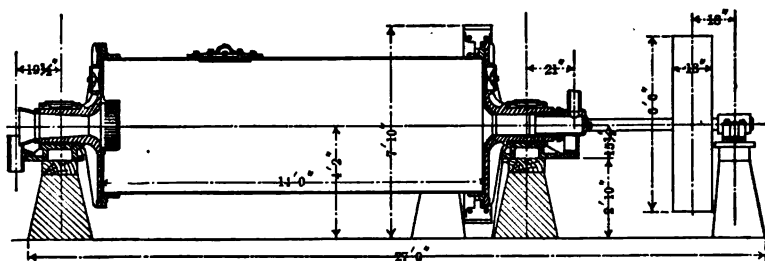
TUBE MILL. SECTIONAL ELEVATION.
